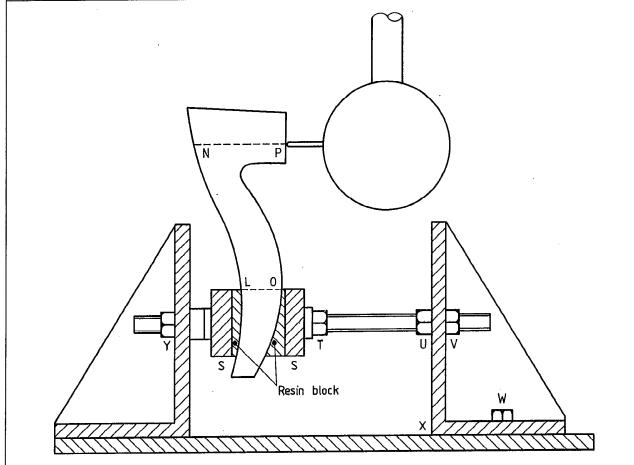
/5. Position of the unit and the resin blocks in the clamped assembly for testing
